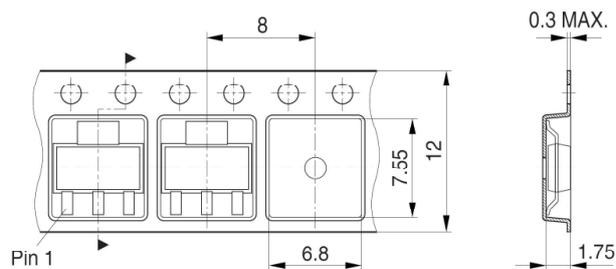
Outline PG-SOT223, dimensions in mm/inches
